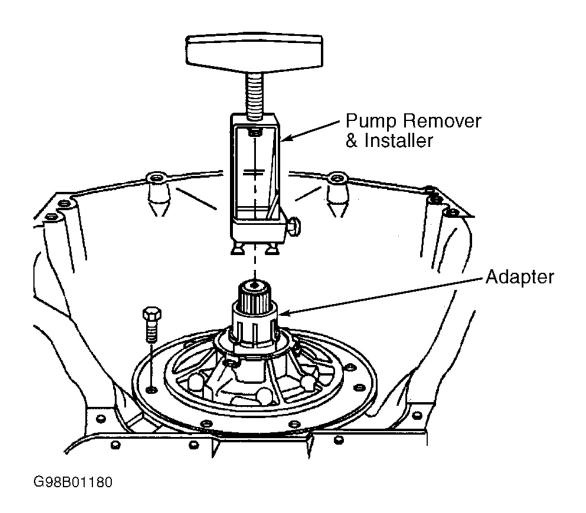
Removing Oil Pump Assembly Courtesy of GENERAL MOTORS CORP.
